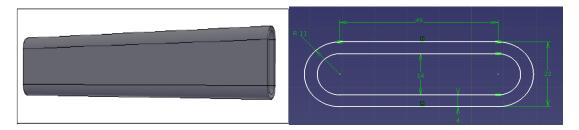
3D drawing of composite blade Figure 3.2 Front view of composite blade
